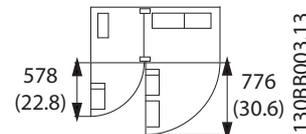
Front Clearance of IP21/IP54 Enclosure Type, Frame Size F1
